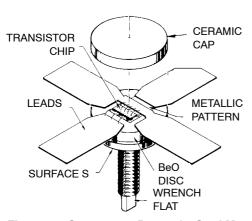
Component Parts of a Stud Mount Stripline Package. Flange Mounted Packages are Similarly Constructed
